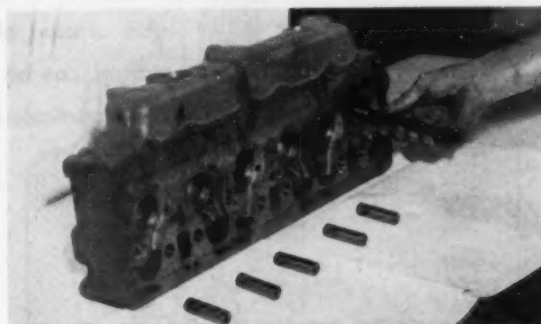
In assembly press valve guides are picked up six at a time from gravity feed hopper by hydraulic rams and inserted in drilled and reamed holes in casting.
